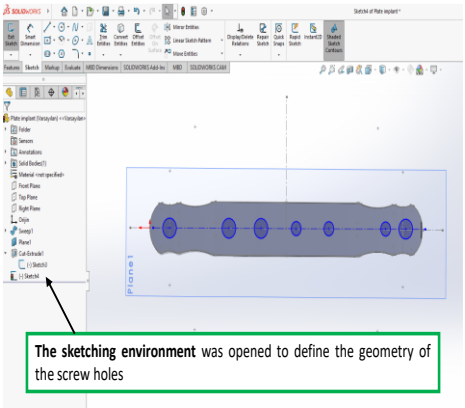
Design of screw hole positions and dimensions on the surface of the plate implant through 2D sketching.
